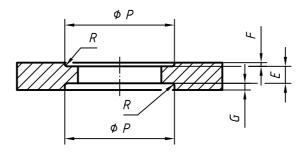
Grinding wheel recessed on both sides, e.g. as specified in ISO 603-1
